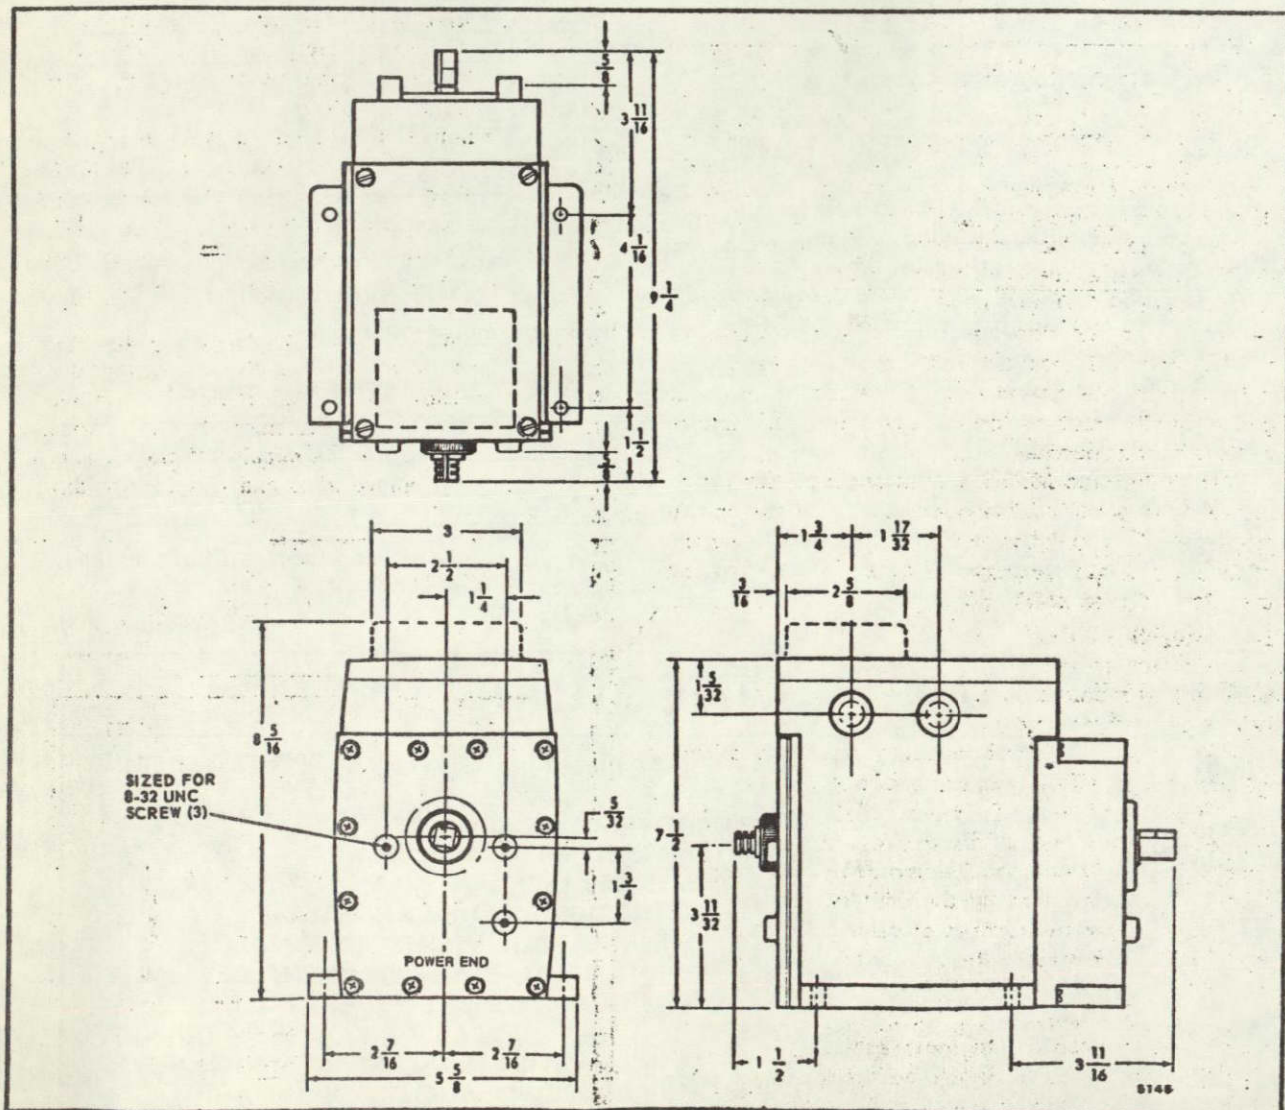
DIMENSIONS OF M445 AND M845 MOTORS (IN INCHES). BROKEN LINES SHOW ADDITION OF COVER MOUNTED TRANSFORMER.
